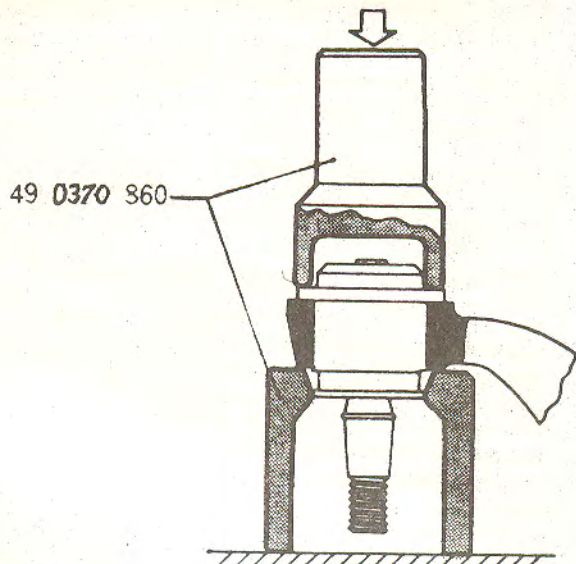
Installation of the ball joint into the lower suspension arm.
